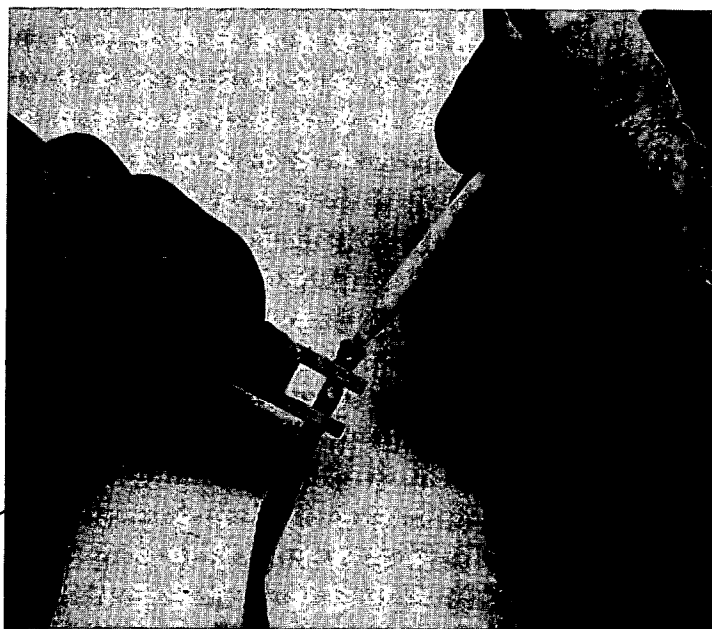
Clean the shank holes with a #37 drill (.104") rather than the 7/64" (.109") that the supply houses sell for this purpose, since the larger drill makes the hole bigger than original. Turning the drill backwards while inserting, then forward to ream, will further prevent damaging the holes.
